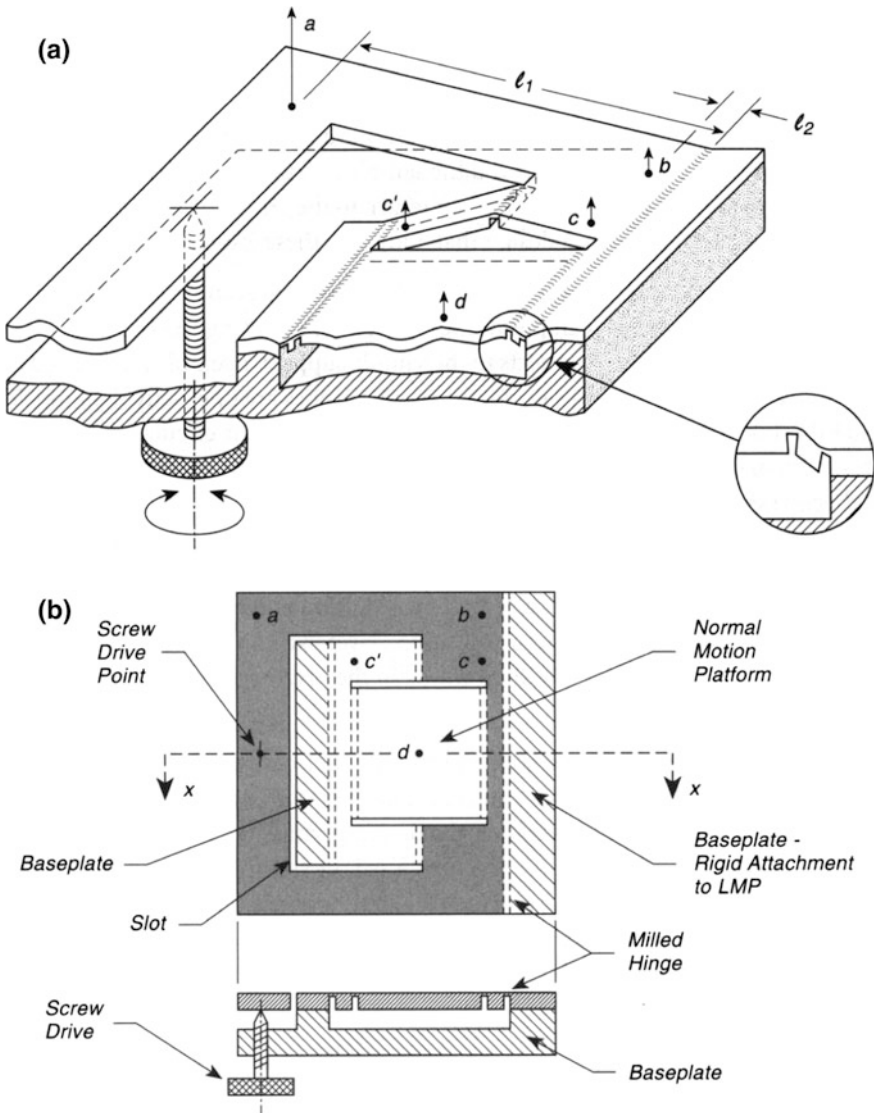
Linear movable platform. a 3D-sectional view of portion of LMP. b Top and sectional view (x-x)
